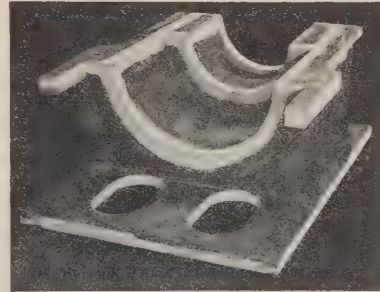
SUBASSEMBLED COMPONENT OF A WELDMENT
